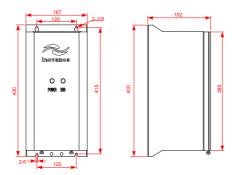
Mounting dimensions of MDBU series braking unit (mm)
